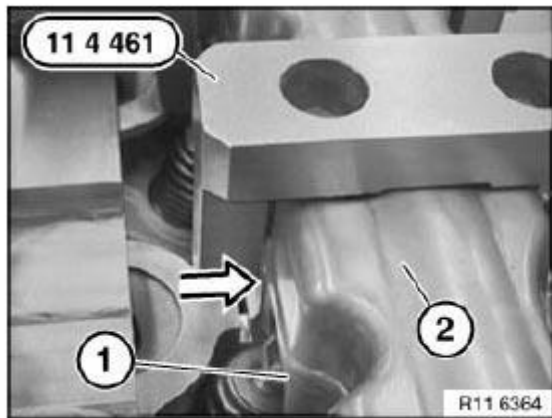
Special Tool (11 4 461), Upper And Lower Bearing Bank
